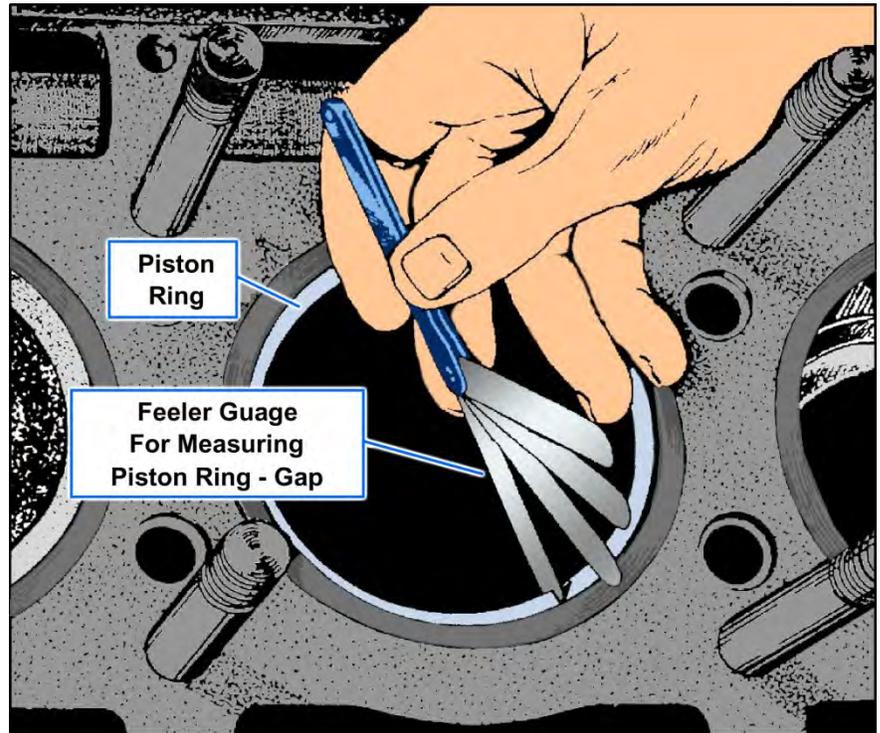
Leveling a piston ring and measuring ring gap clearance in a cylinder bore.
